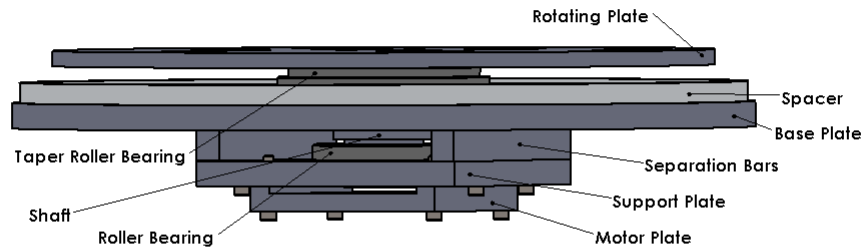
Drawing showing the manufactured system assembly (without the blade)
